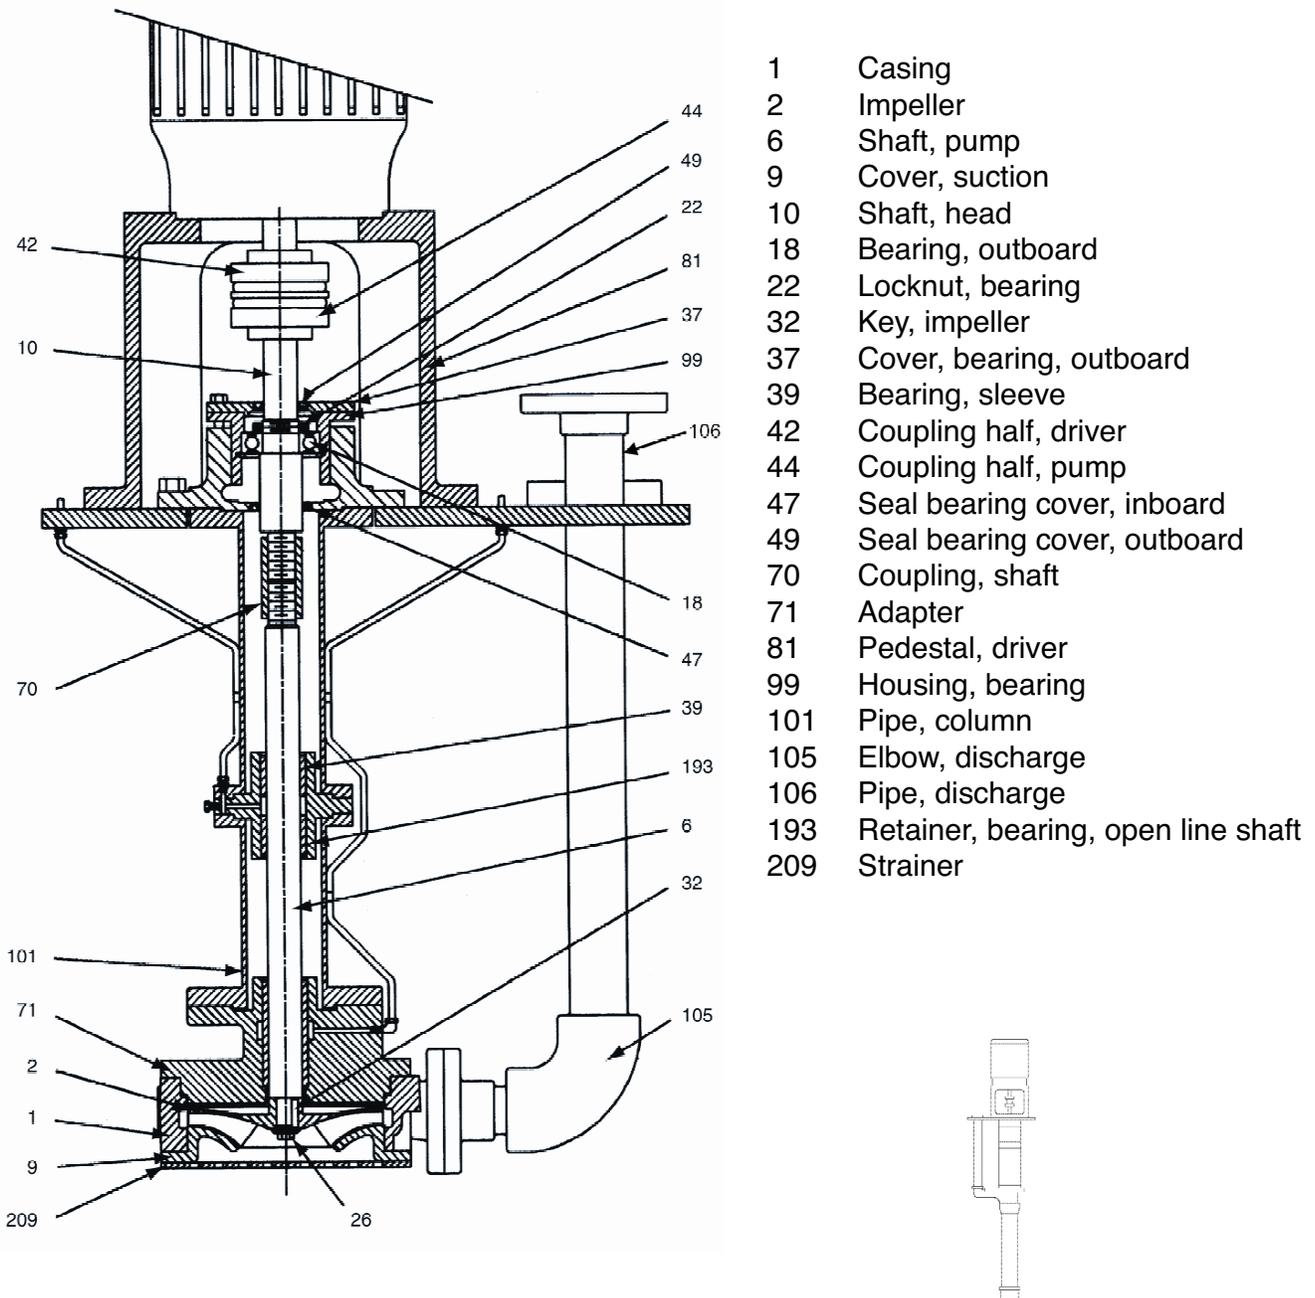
Line-shaft design sump pump (VS4)
